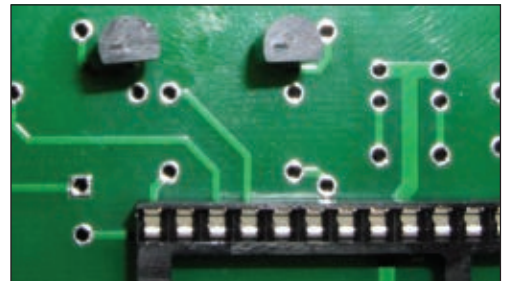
Bottom view PCB; close-up shows the transistor orientation.
